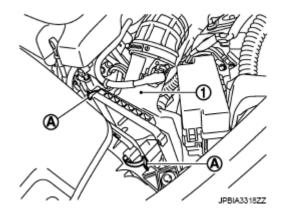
Identifying Air Cleaner Cover Assembly And Clips Courtesy of NISSAN MOTOR CO., U.S.A.
